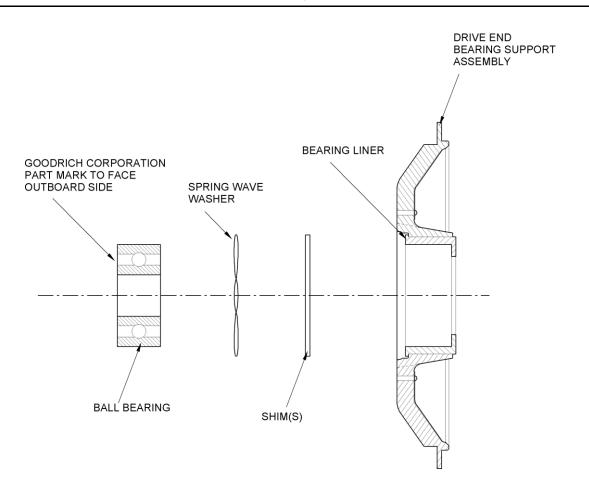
Spring Loaded Assembly, Sectional View (Pre-Load)
